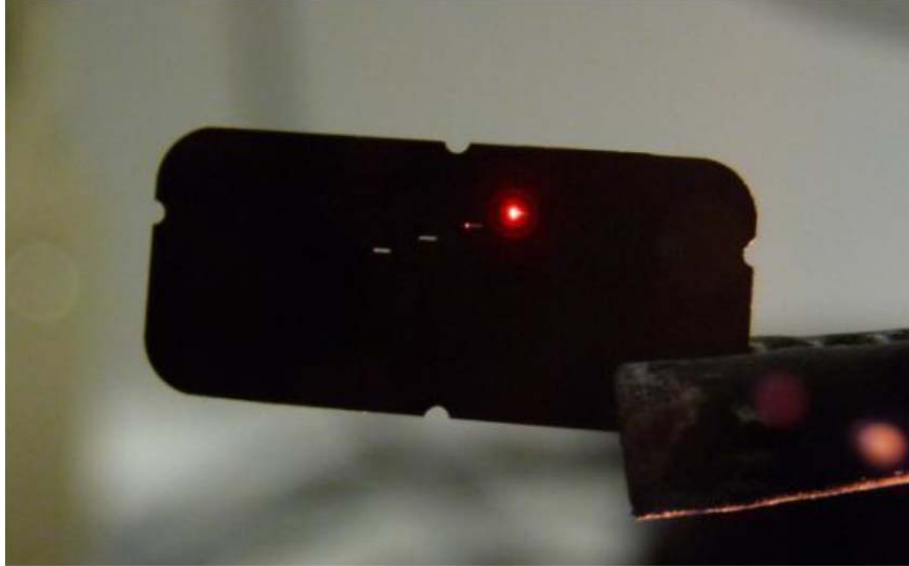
Machined multi-slit plate according to multi-slit plate rev 2 drawing.
